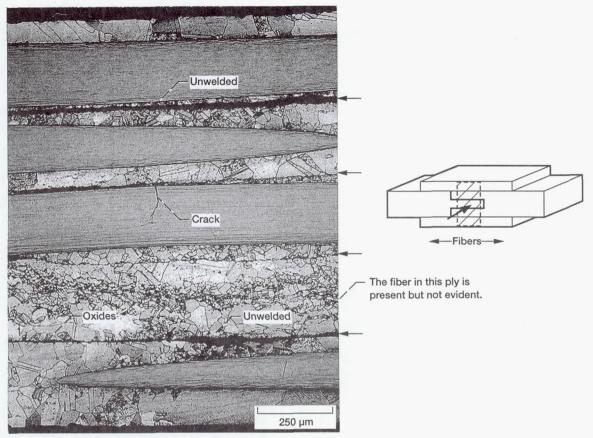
Longitudinal section of panel B tongue-in-groove butt joint in three-ply W-Cu composite. Tongue and panel surfaces under doublers were sputter coated with Cu prior to diffusion welding. Arrows indicate weld interfaces. Etched.
